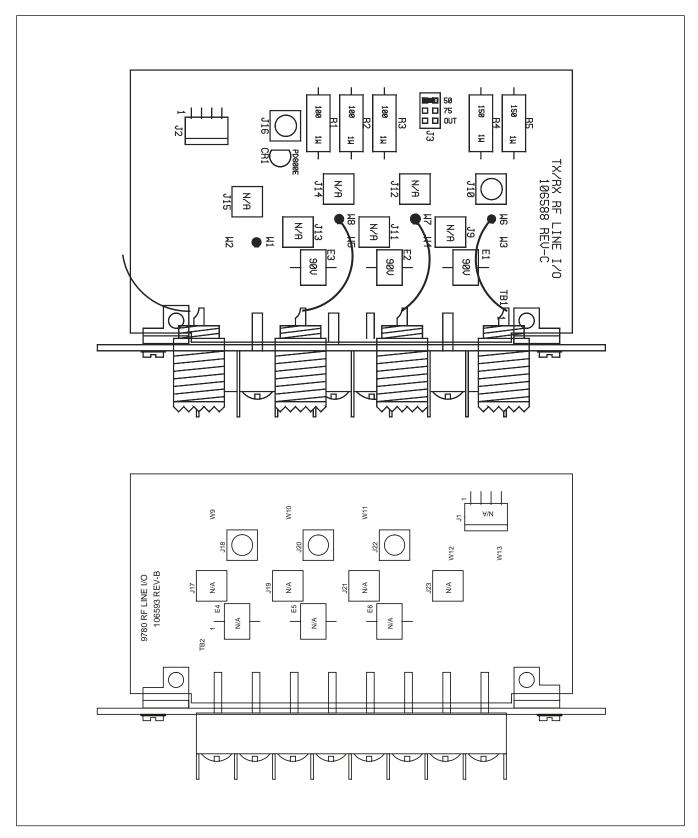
Component locator drawing, TX/RX RF Line I/O module (106585-8)
